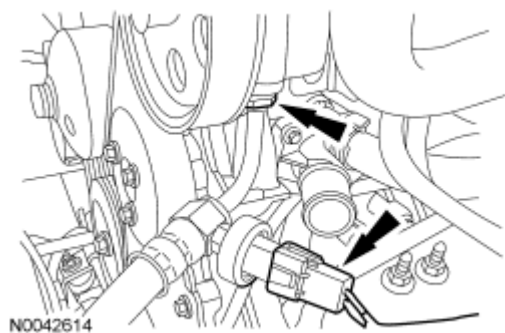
Locating A/C Compressor Manifold Bolt
